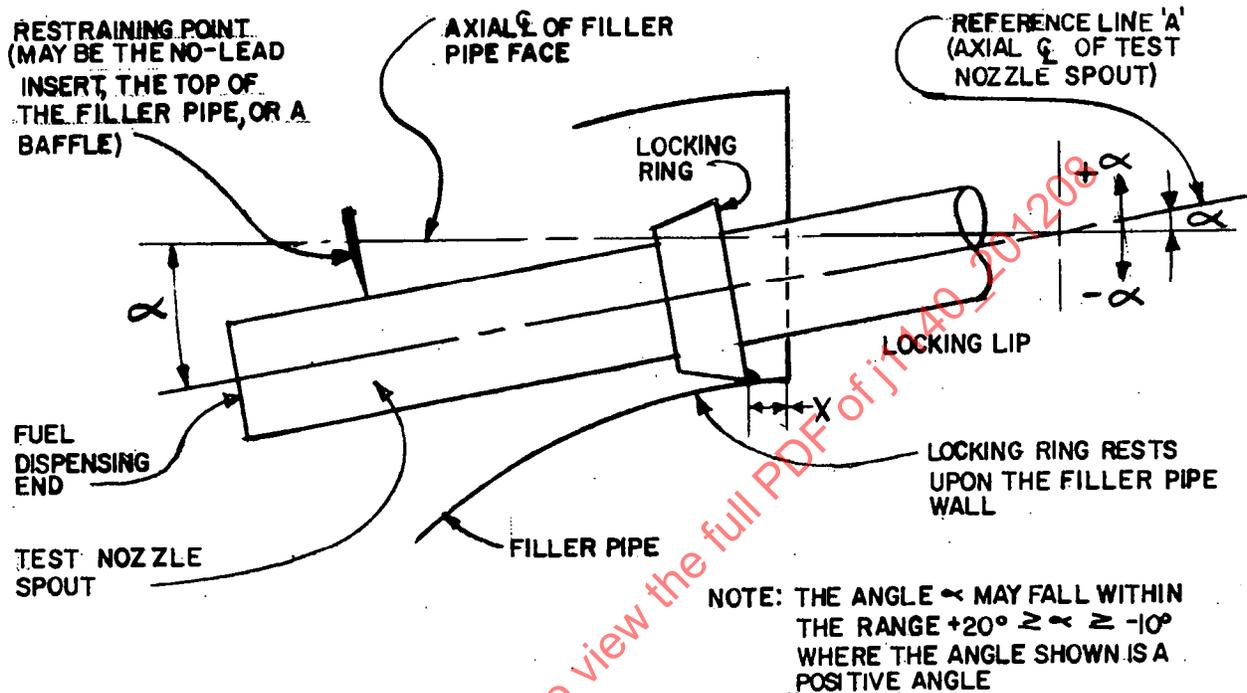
A—SAE J1114, TYPE FILLER PIPE (NORMAL RESTING POSITION)
